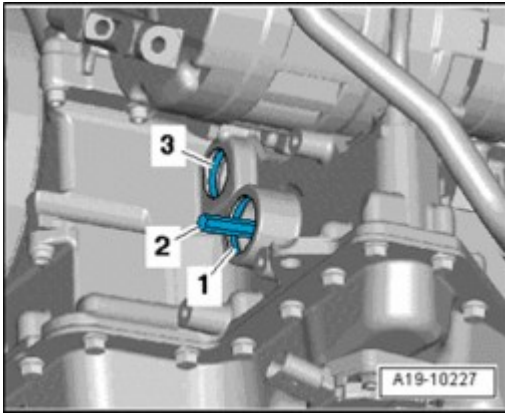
Inserting New O-Rings & Coolant Pump Input Shaft In Oil Pump Mount
